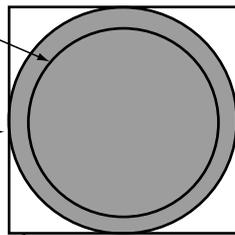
Footprint - 5 mils stencil - non solder mask defined
